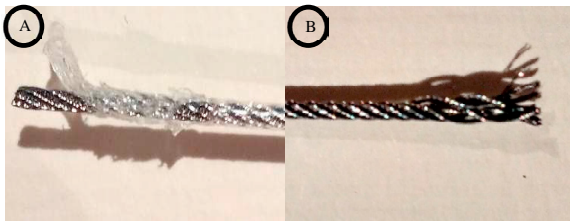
(a) Stripping Defects and (b) “deinterlaced” Cable.
